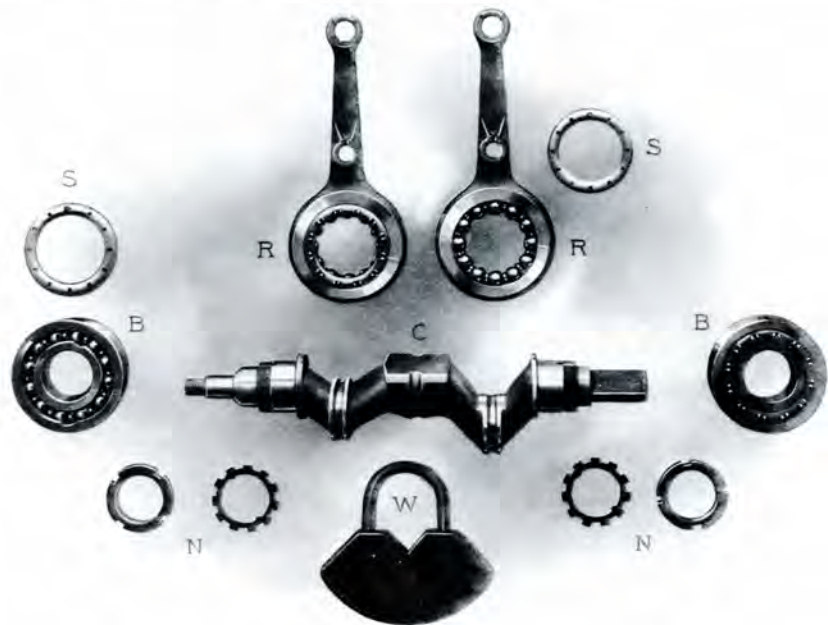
THE CRANK-SHAFT AND ALL THE PARTS ATTACHED THERETO
